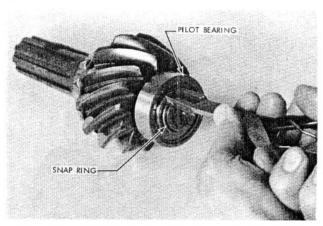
Pilot Bearing Snap Ring Removal or Installation
